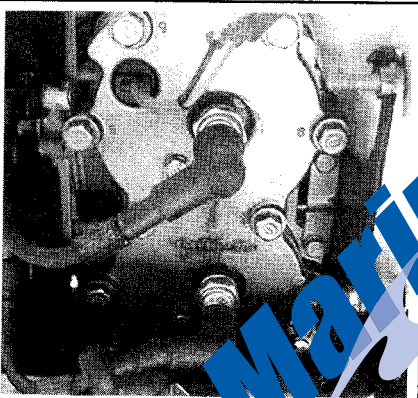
The spark plugs are threaded into the center of the cylinder cover
